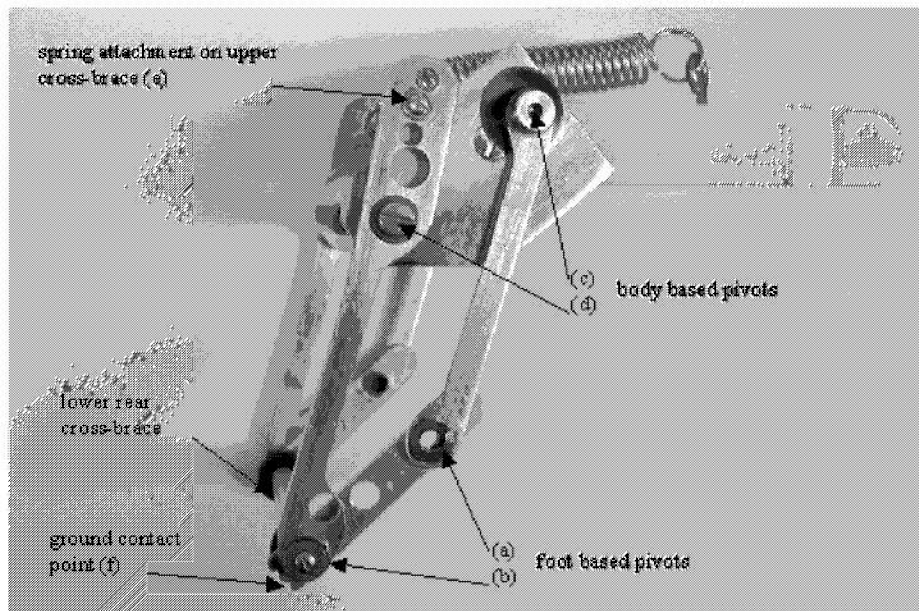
Original Flying Four-Bar jumping mechanism prototype.
